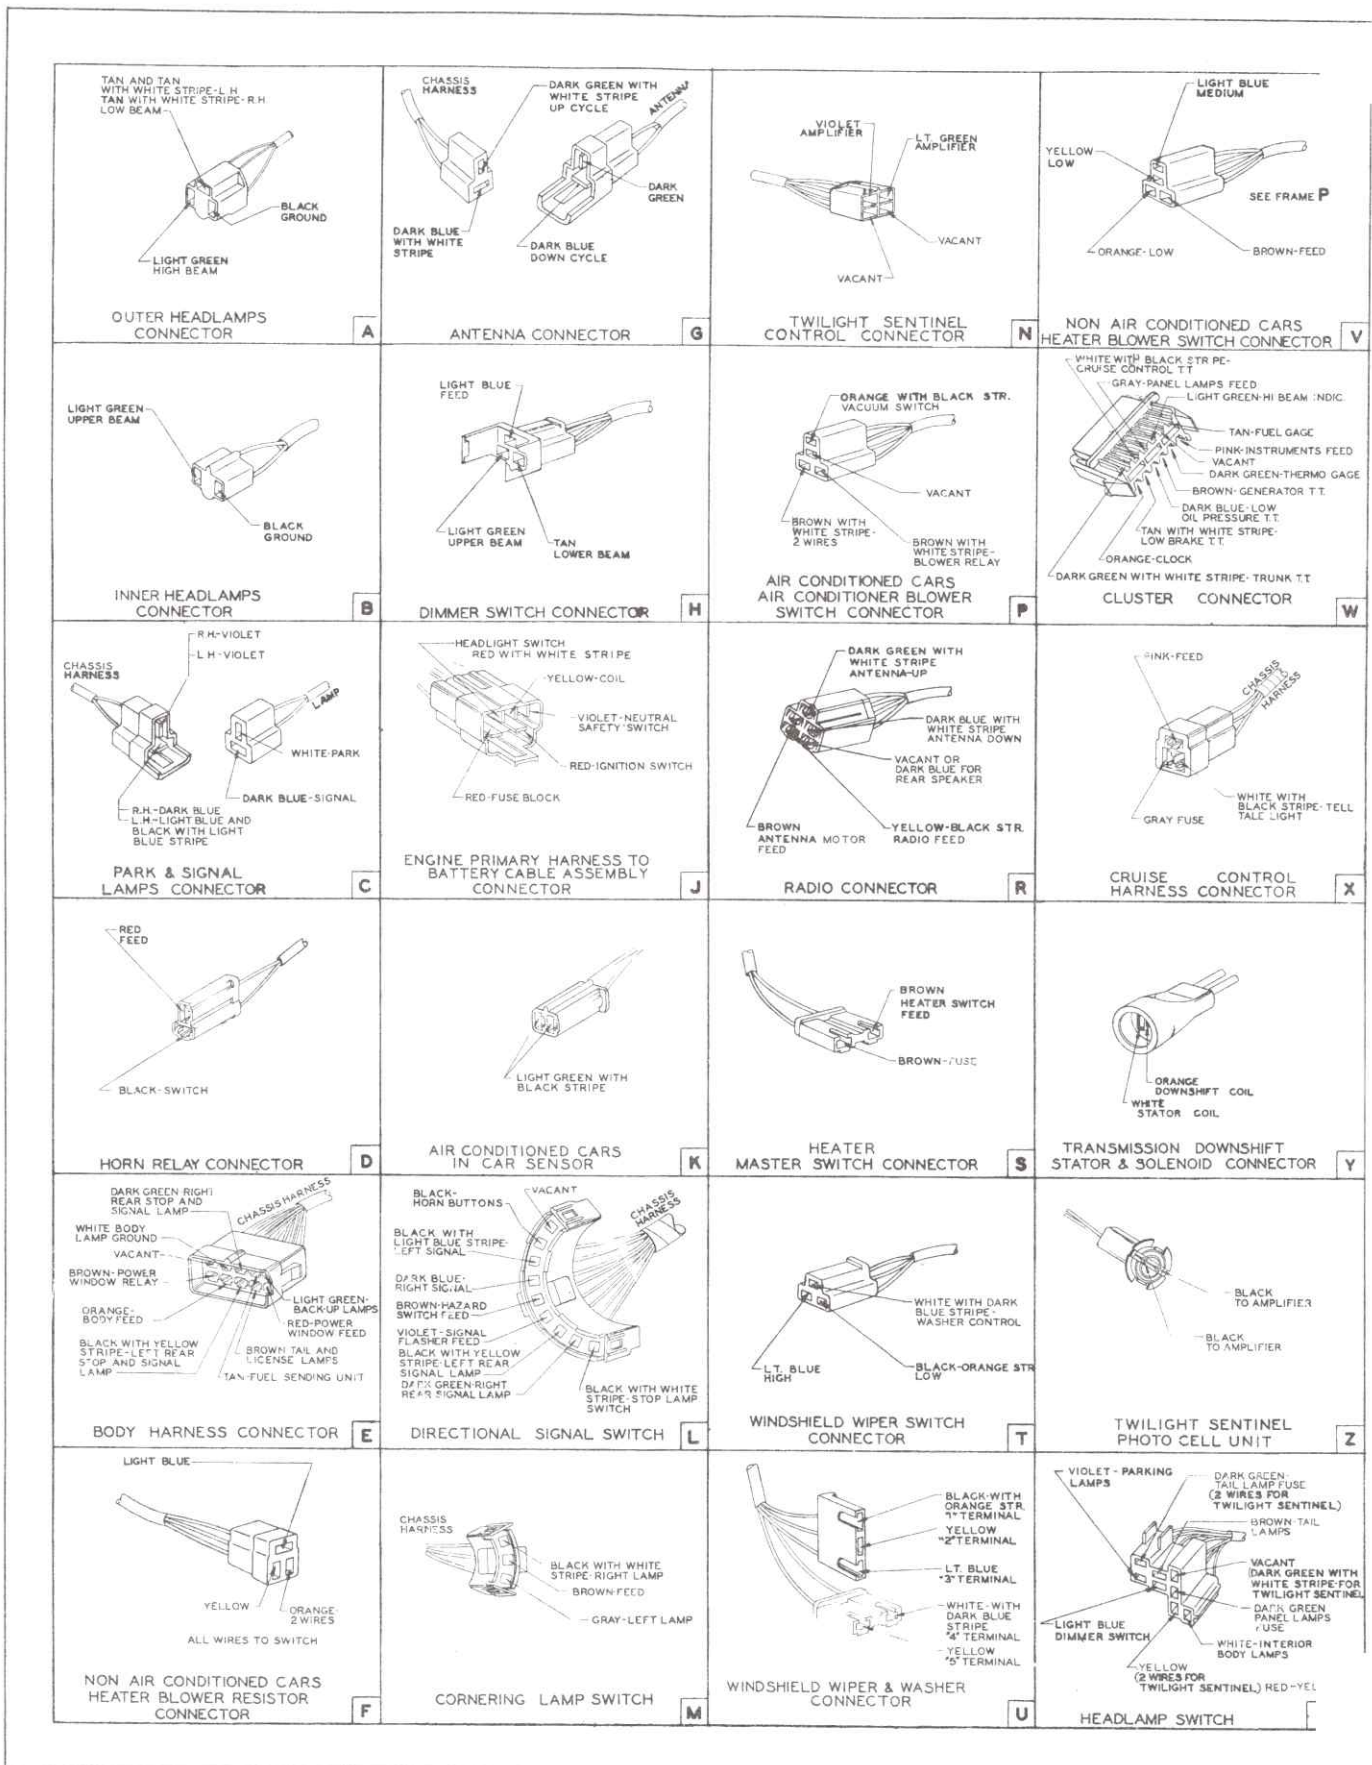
Chassis Wiring Connectors - 693 Styles
